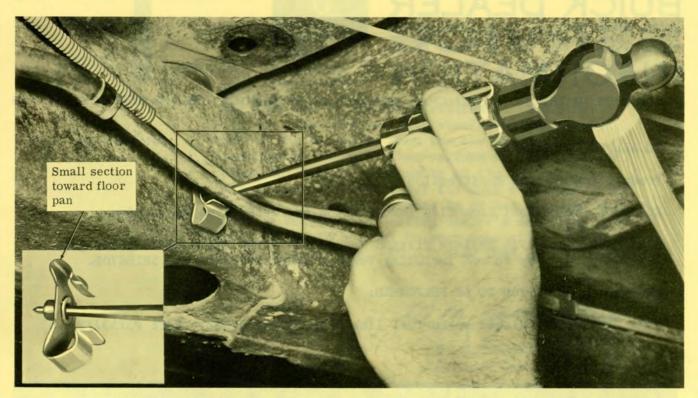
Position clip in hole as shown. Insert awl through small hole in clip and rap awl with hammer several times to expand clip. Remove awl from clip by working handle from side to side and pulling outward. Check clip to be sure it is firmly attached to frame side rail. If necessary repeat installation procedure.
